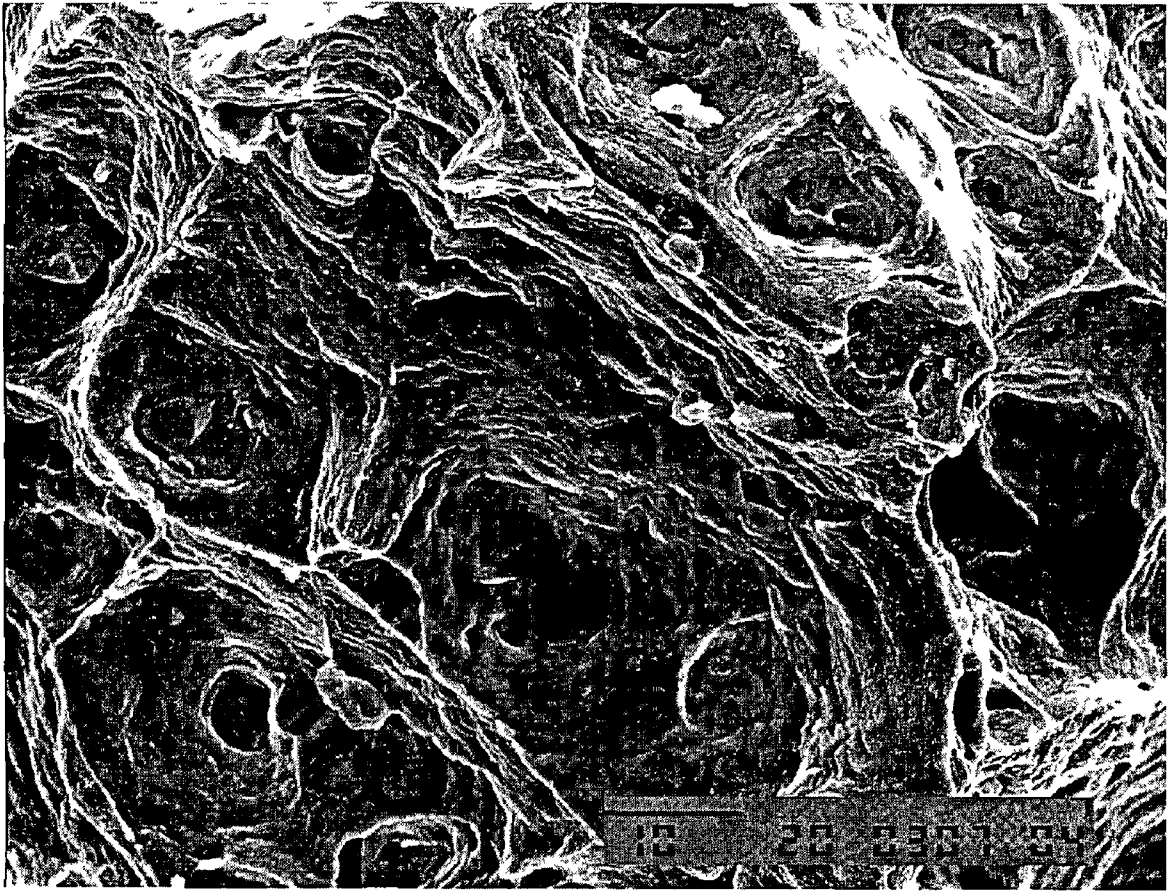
10b Dimples after fatigue test of one hour heat treated workpiece
